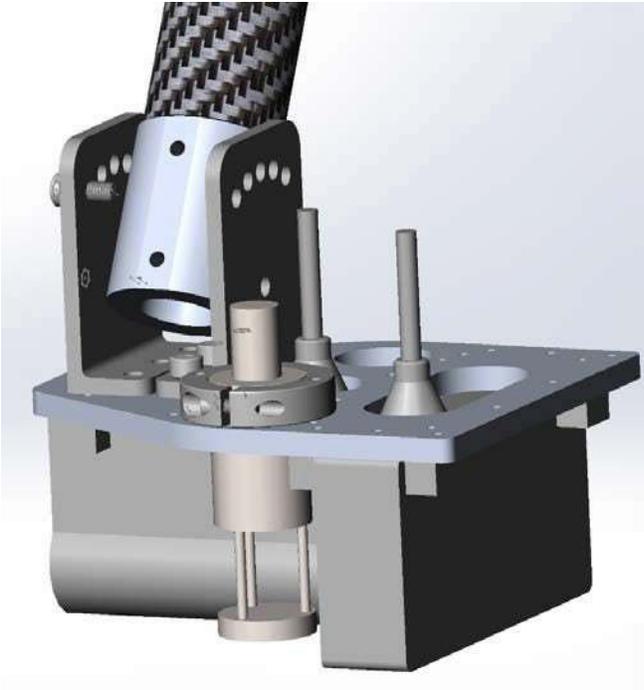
PicoMBES 120 sensor assembly with cover CAD model
